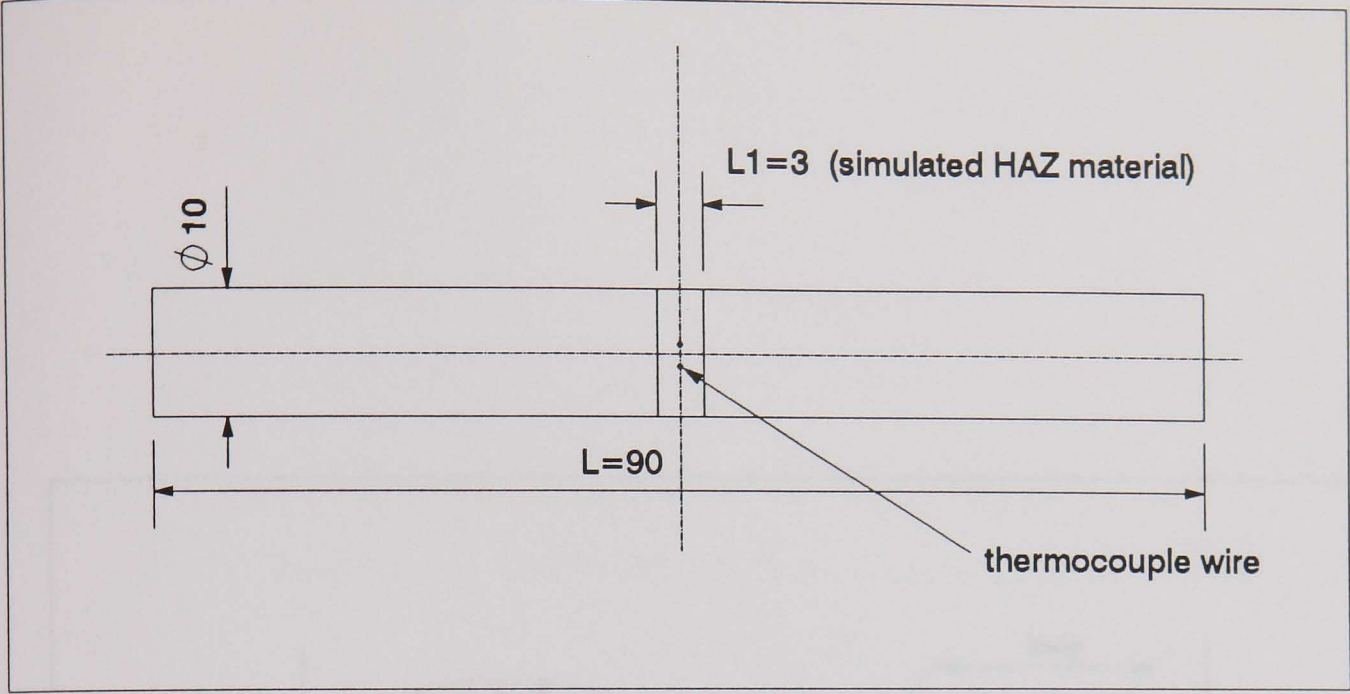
Dimensions of Gleeble specimen (mm).
